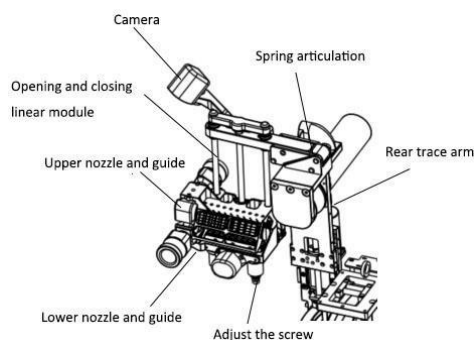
Design Drawing of Wire Adhesive Spray Head.
